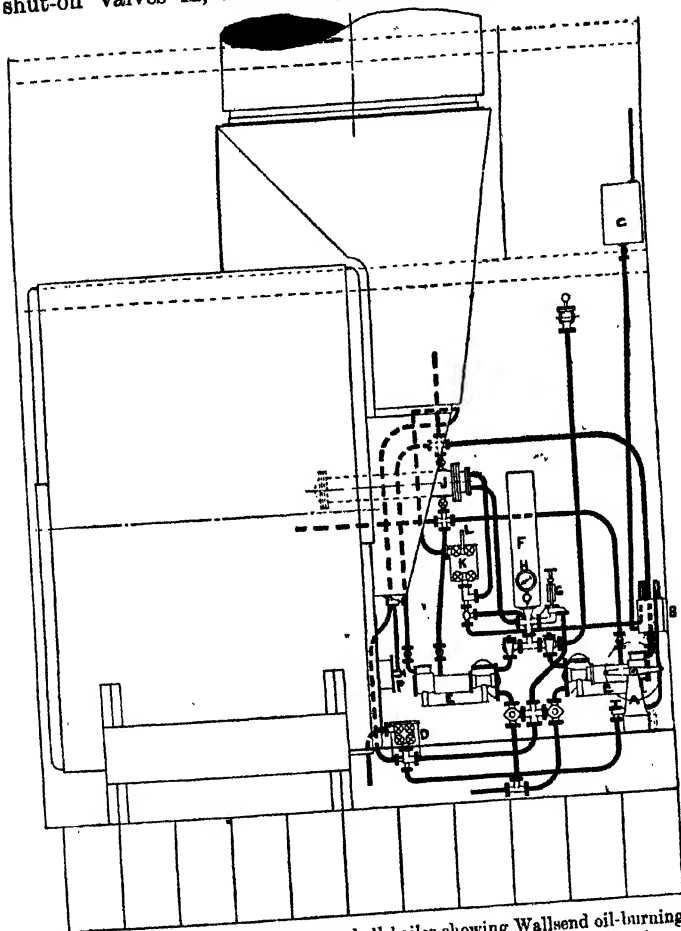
Elevation of marine type shell boiler showing Wallsend oil-burning apparatus (duplicate oil-feed pumps, filters, heater, and starting lamp).,
